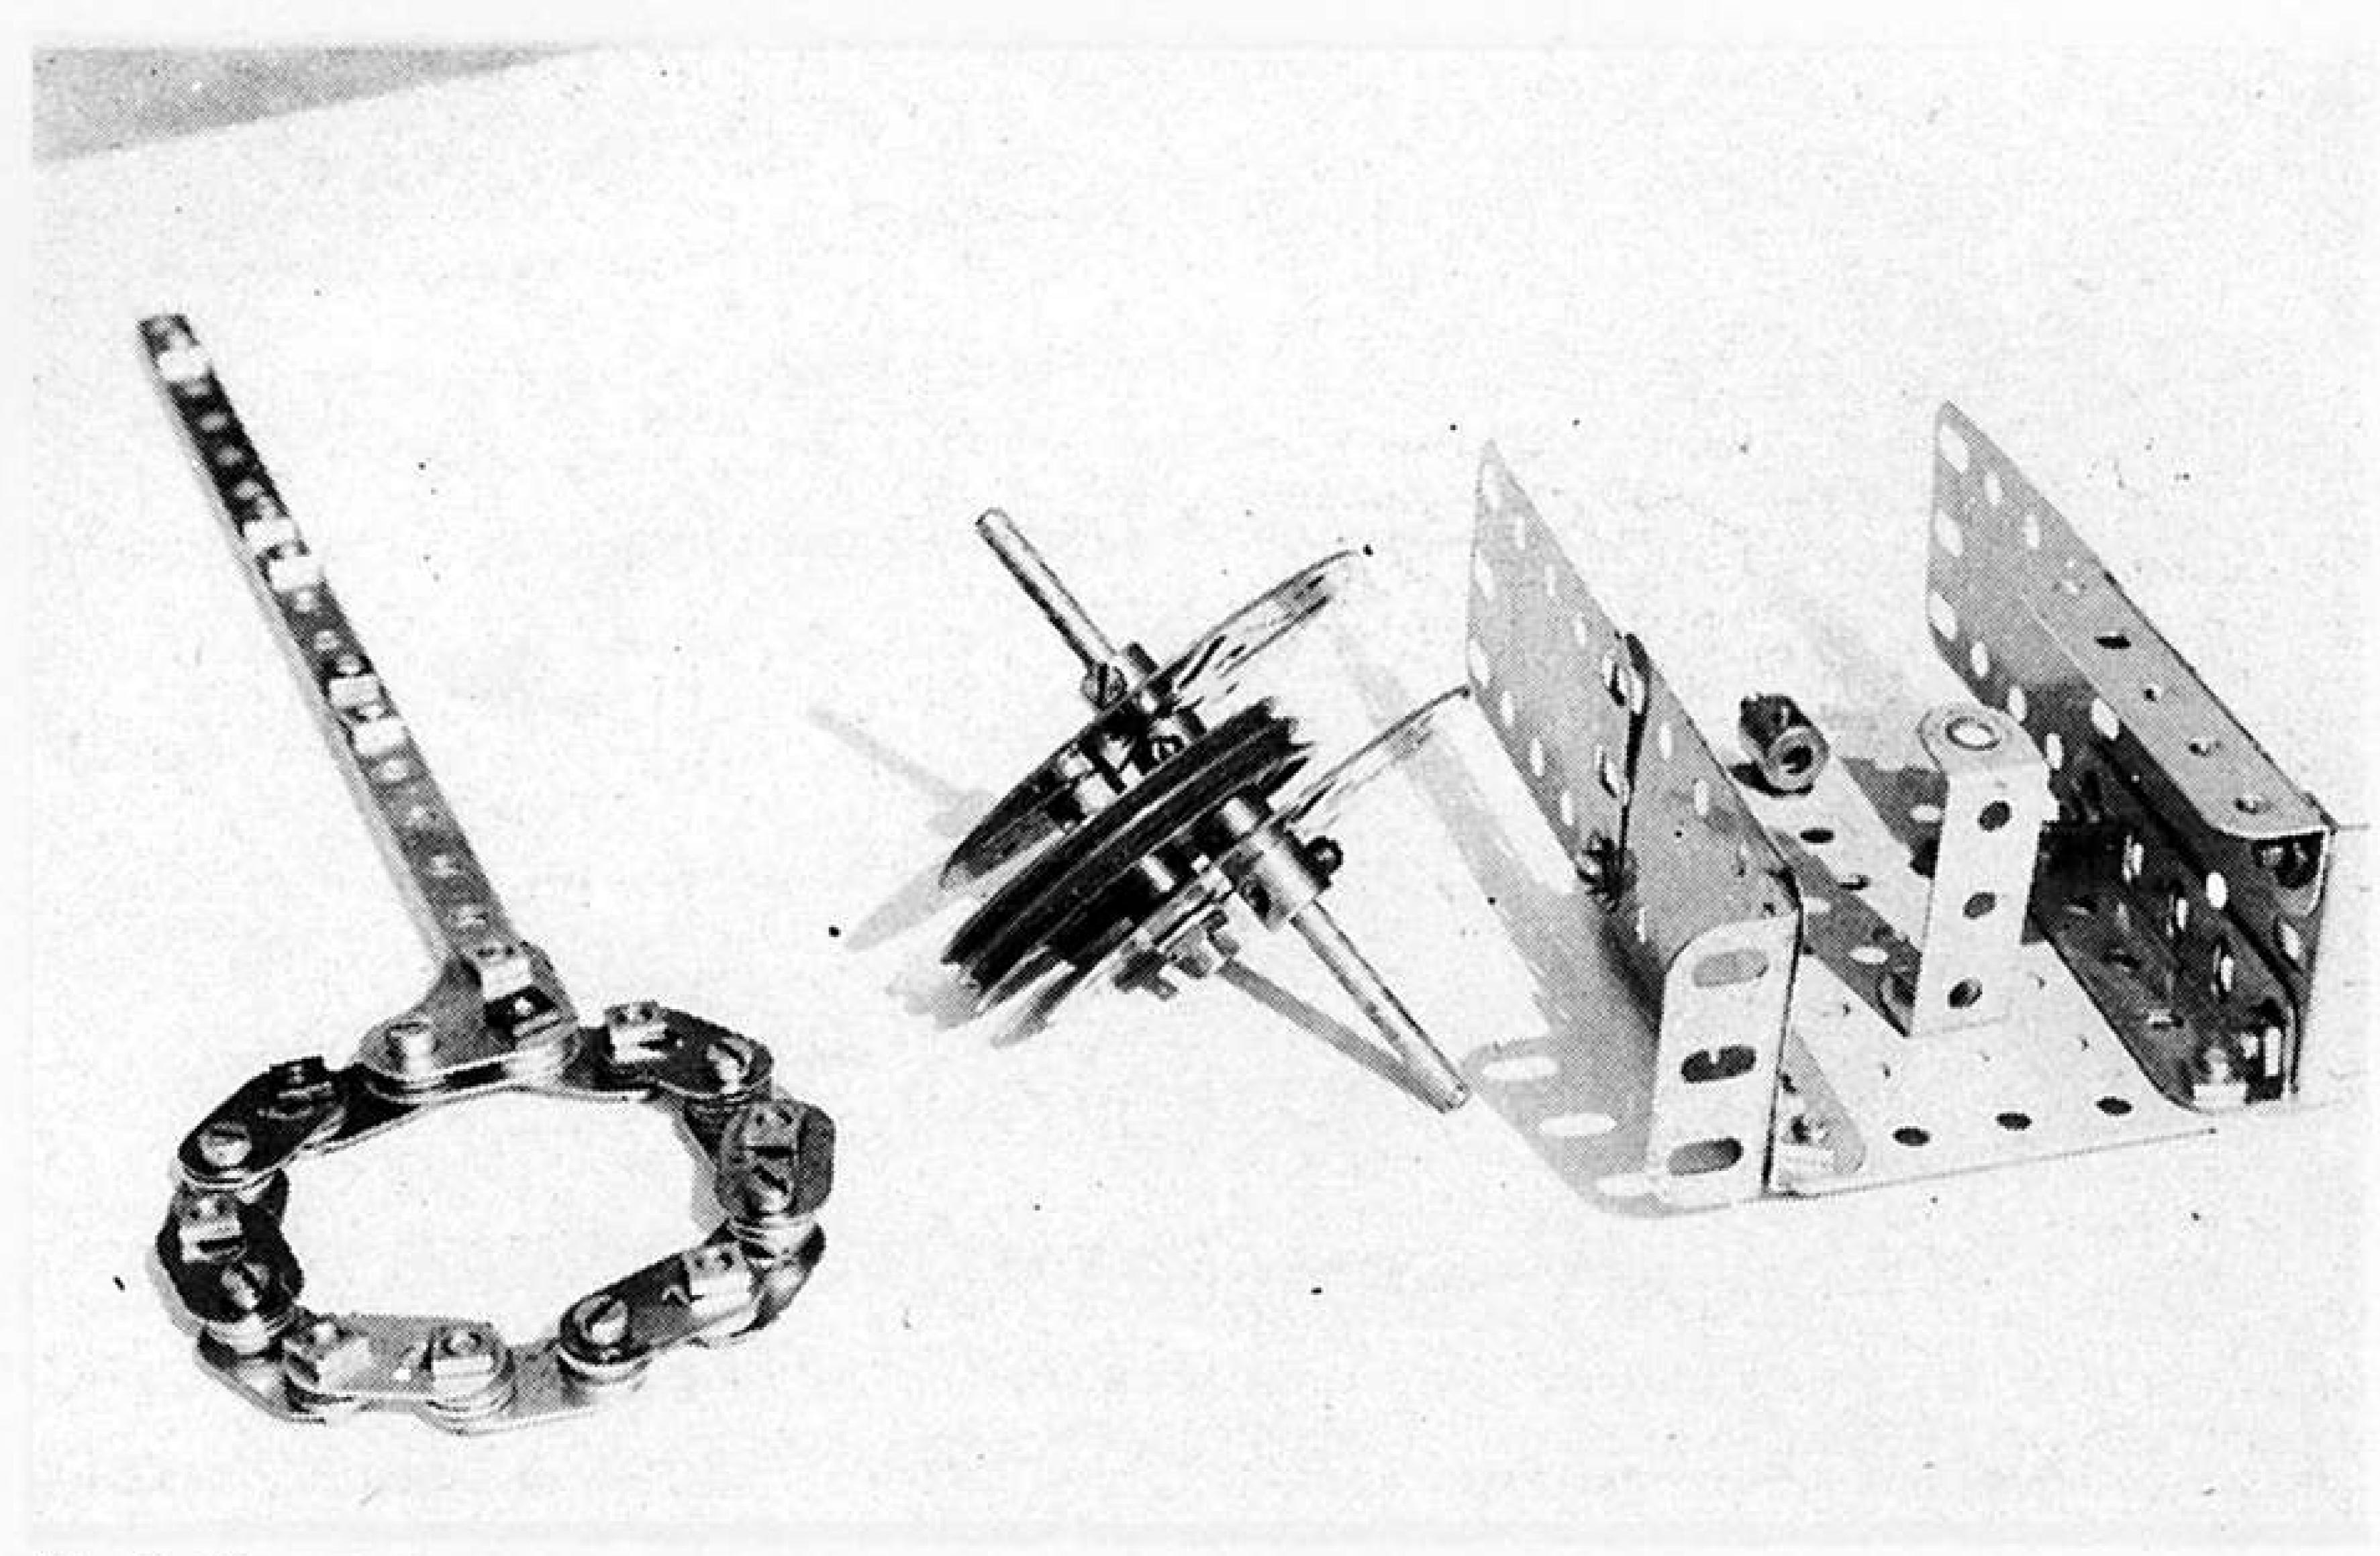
(From left to right), The eccentric strap, built-up eccentric and a section of one of the two bearing supports.
